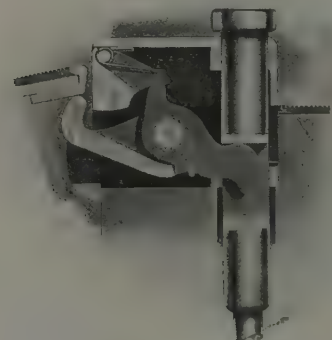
Section of Design H, Trap Door Lock, With Latch Releaser and Starting Device Forcing Door Open.
